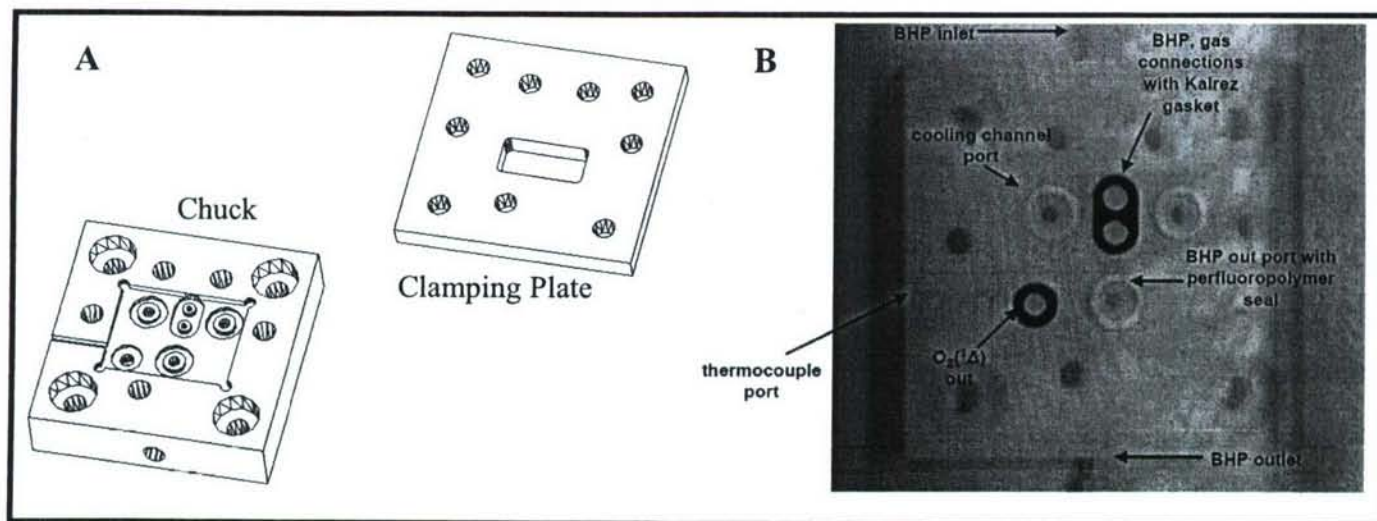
3D drawing of the improved μ SOG package (A), and photograph of the package chuck with the o-ring and gaskets installed (B).
